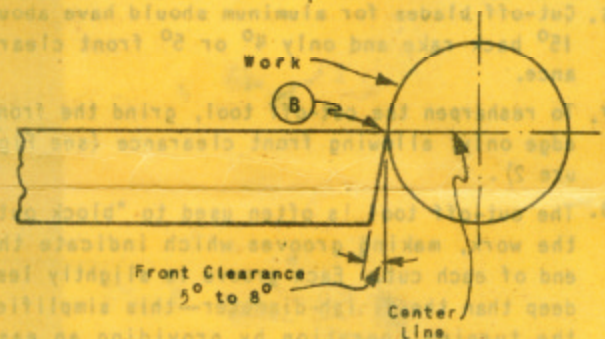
Side view of blade showing front clearance and correct setting of blade to work.
